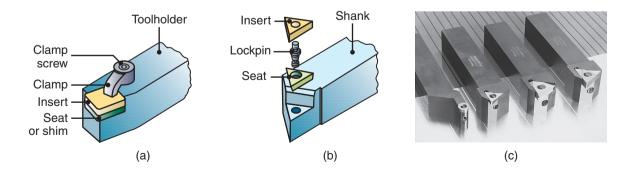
Methods of mounting inserts on toolholders: (a) clamping and (b) wing lockpins. (c) Examples of inserts mounted with threadless lockpins, which are secured with side screws. *Source:* Courtesy of Sandvik.
